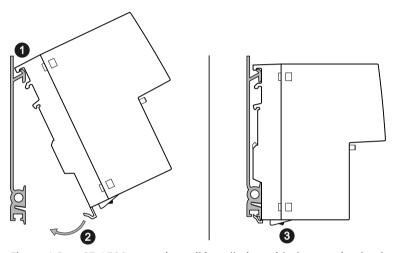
S7-1500 mounting rail installation with the securing bar in the wall mounting position.
